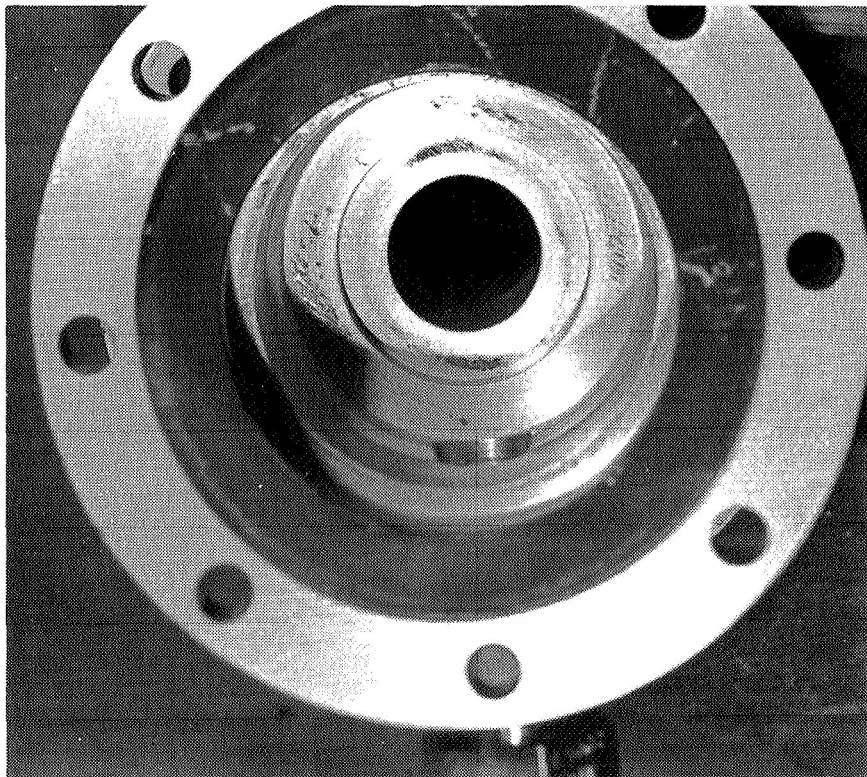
1 Valve Actuator Body Interior After Task III Testing
